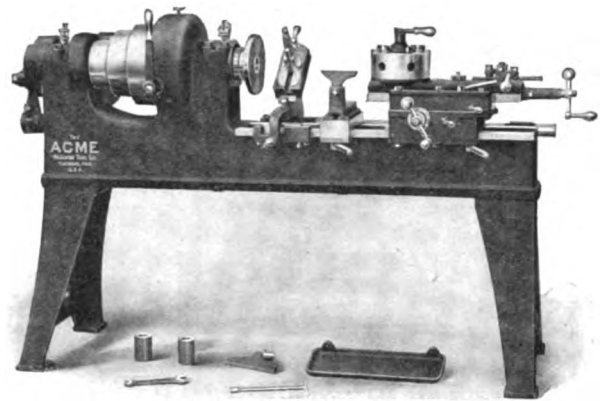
18 Inches (457mm.) Universal Turret Lathe
